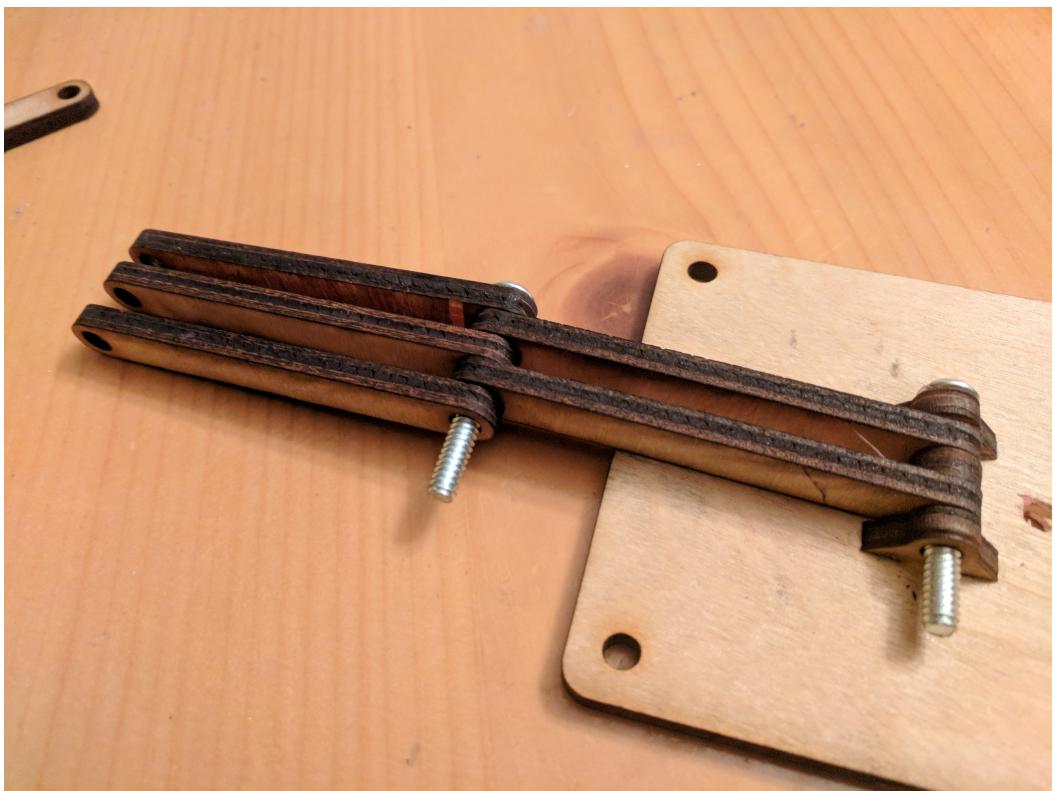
Add three more arm pieces and place a 10-24 bolt through those 5 stacked
